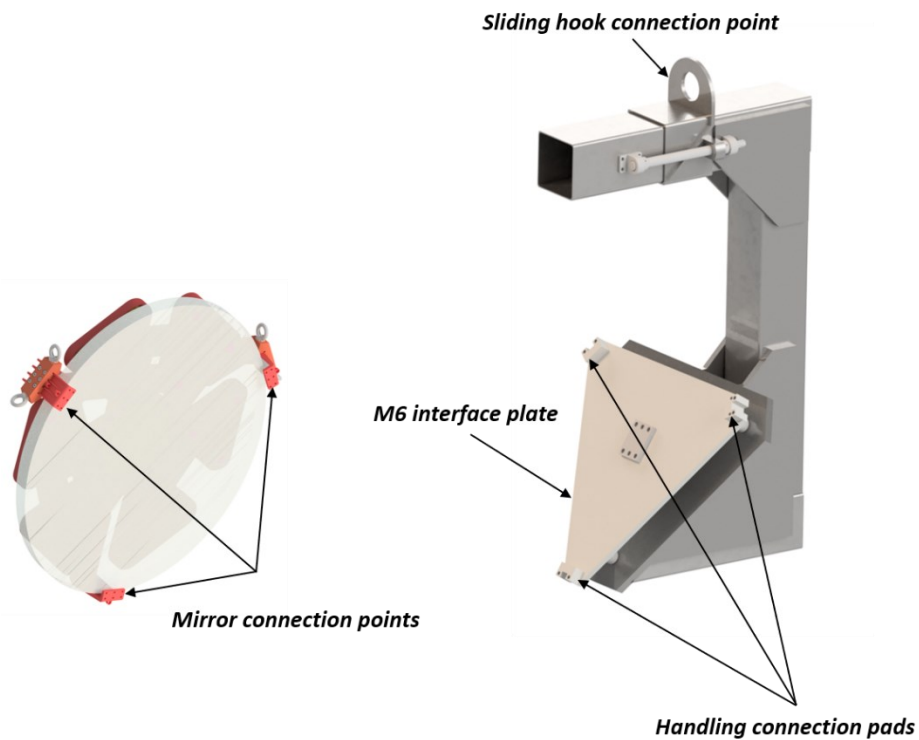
C-shaped handling for M6 installation. The interface between M6 and the handling is between the 3 branches embracing M6 and the 3 connection pads of the handling. The handling is equipped with a hook hoisting connection point having the possibility to slide, in order to have it aligned with the barycentre of the system both when M6 is connected and disconnected.
